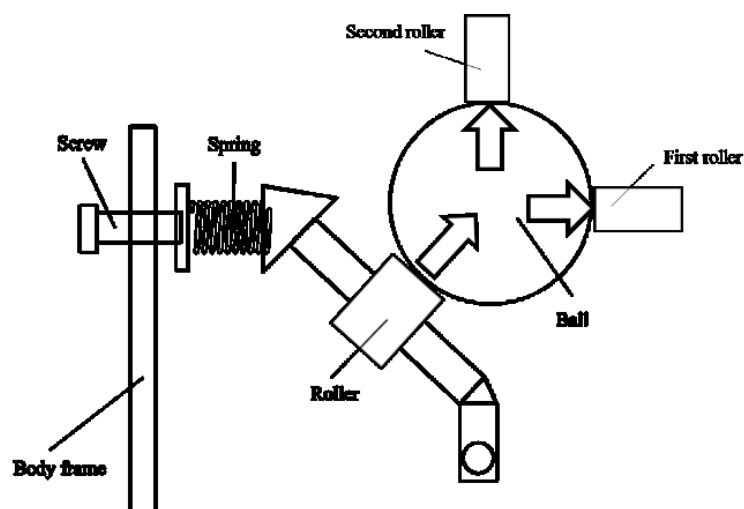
Pre-loading mechanism for the 1st and 2nd drive rollers
